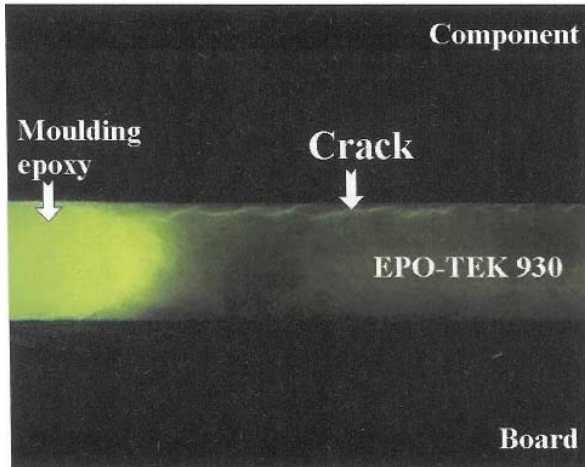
Microsection showing cracks in the EPO-TEK fillet close to a corner of the component formed during reliability testing
